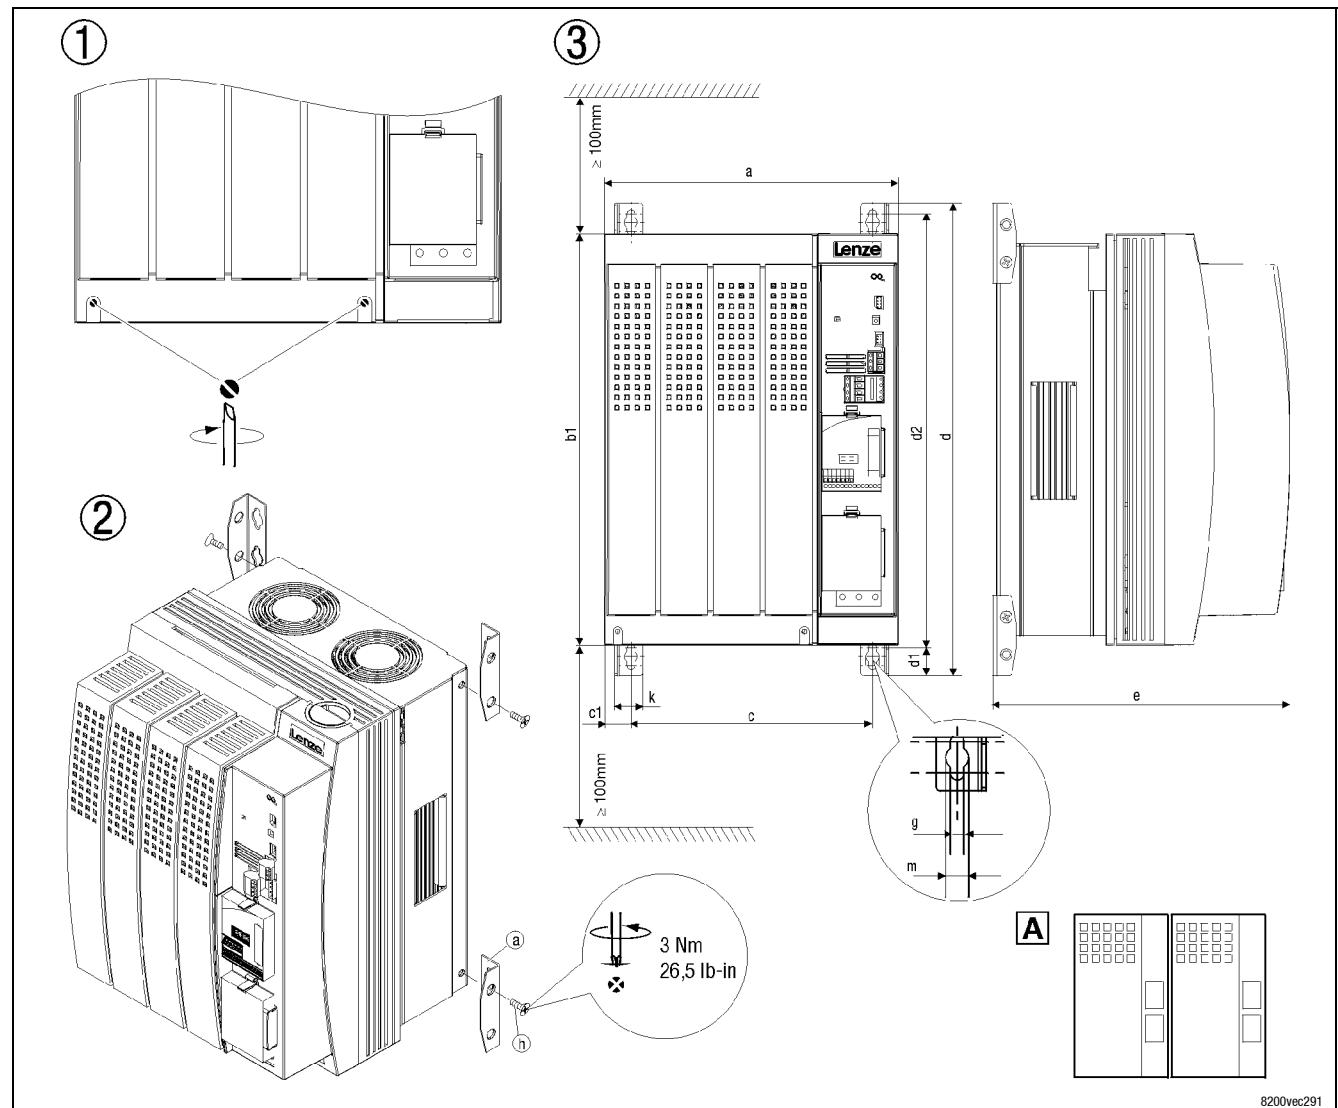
Standard mounting with mains choke 15 ... 30 kW
